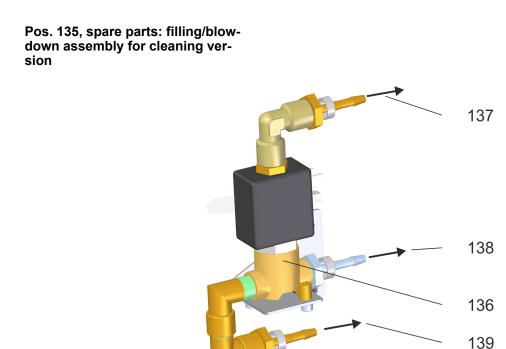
Spare parts: filling/blow-down assembly for cleaning version
